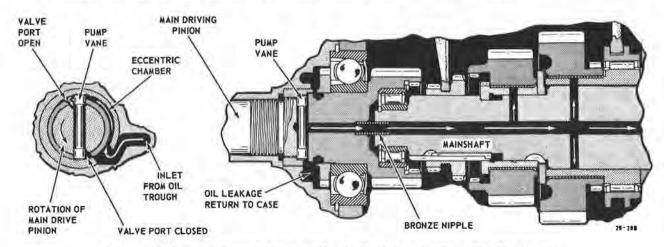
Sectional View of Typical Transmission Oil Pump and Mainshaft Drillings
